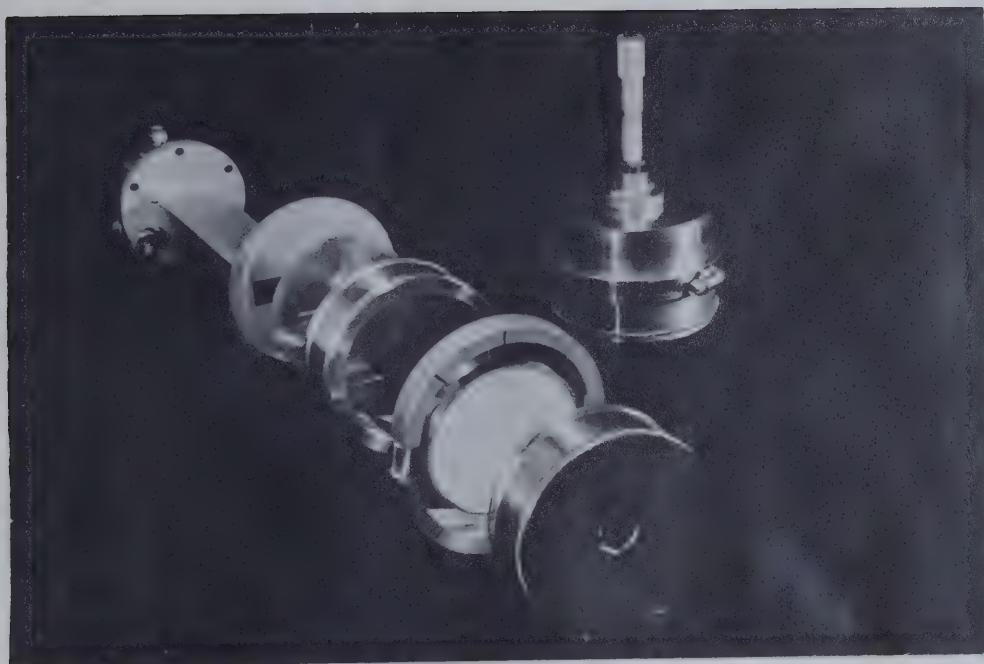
Exploded View of Cavity Fitted with Probe Adapter
